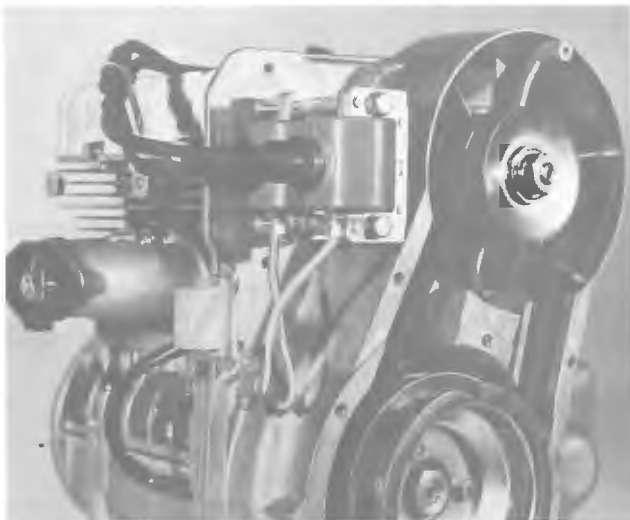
HIGH TENSION COILS AND IGNITION WIRING
